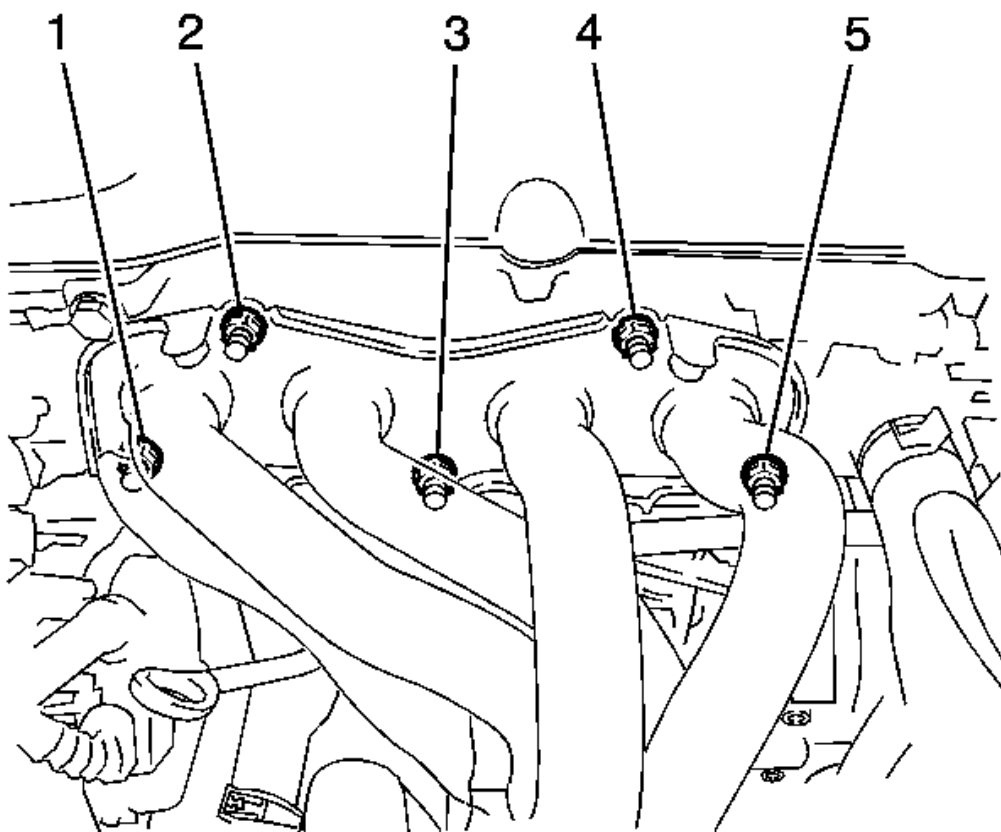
Identifying Nuts & Exhaust Manifold Converter
